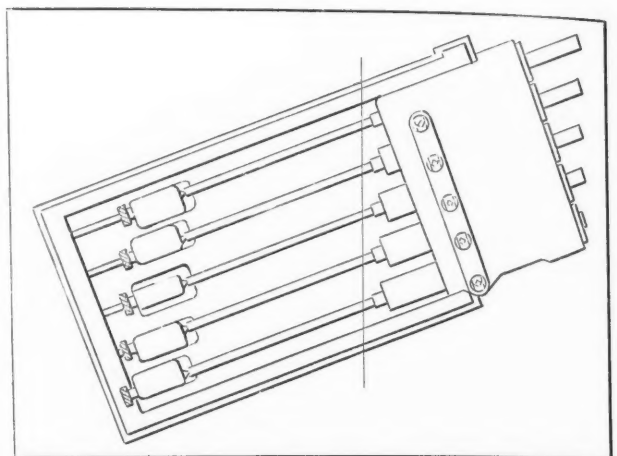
Universal Fixture Used for Holding Five Pieces of Work while Milling Spiral Flutes on Machine Illustrated in Fig. 1
